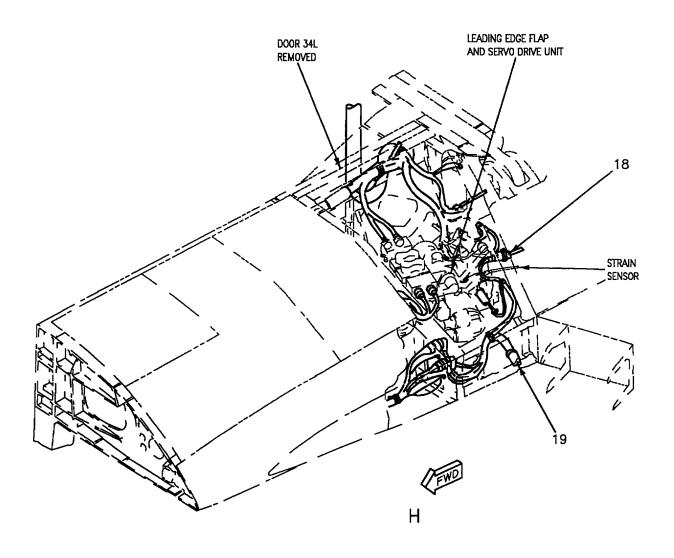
Inner Wing Removal and Installation Attachments (Sheet 3)
